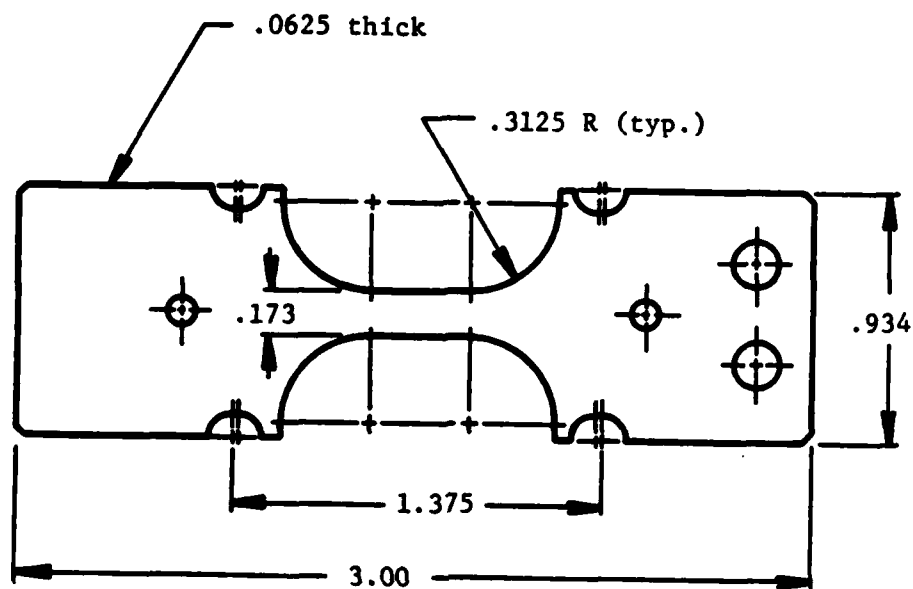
SPECIMEN DESIGN. All dimensions in inches.
